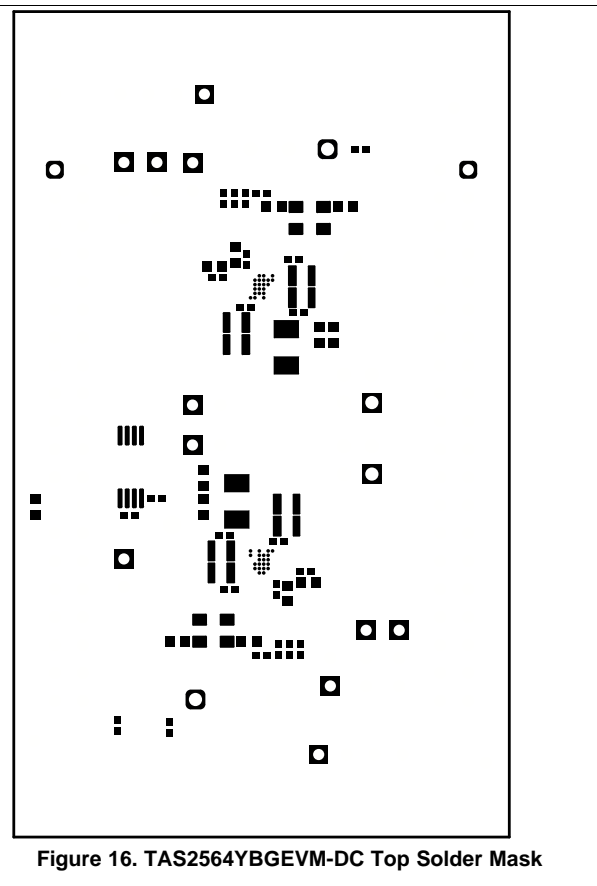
TAS2564YBGEVM-DC Top Solder Mask
